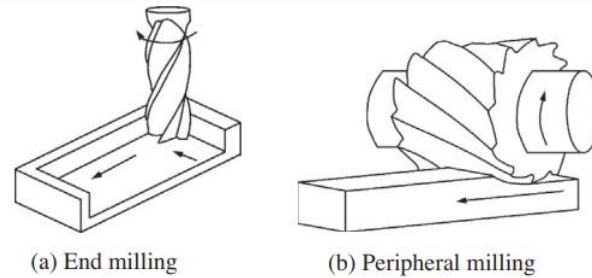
Milling operations: a) end milling and b) peripheral milling. Reproduced from [11]
